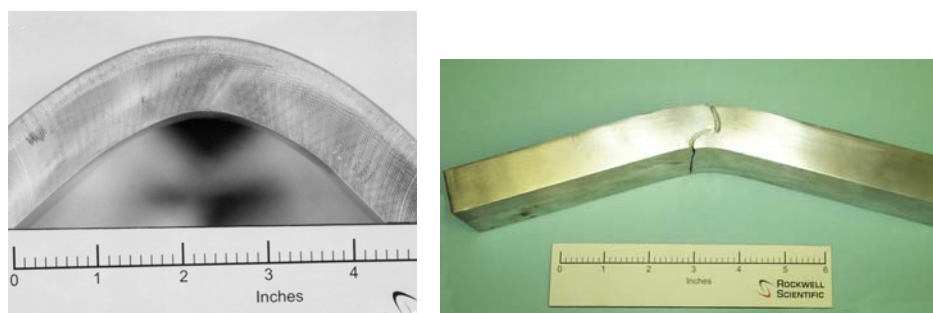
a) Room temperature bending of 25 mm thick 2519 aluminum plate to 80° following FSP to a depth of 6 mm, and b) fracture of as-received plate at a 30° bend.
